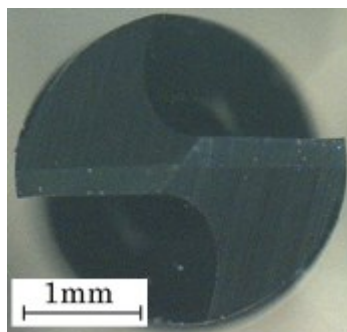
Photograph of cutting edge of non-coated cemented carbide
